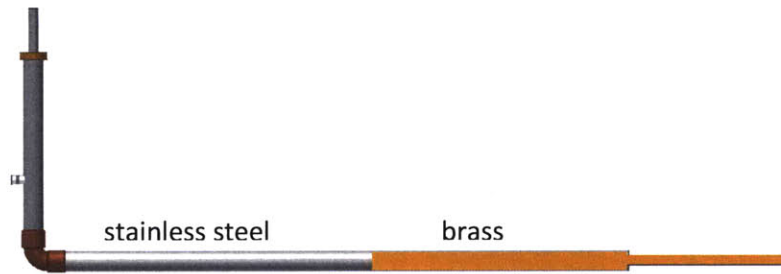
Autodesk drawing of the vacuum jacketed exhaust pipe for the 4 mm 211 MHz probe. The exhaust pipe is made of stainless steel and brass as indicated. The end of the exhaust pipe is not vacuum jacketed to allow the lower part of the probe to cool down efficiently without cooling the entire probe which would result in a cooling power loss.
